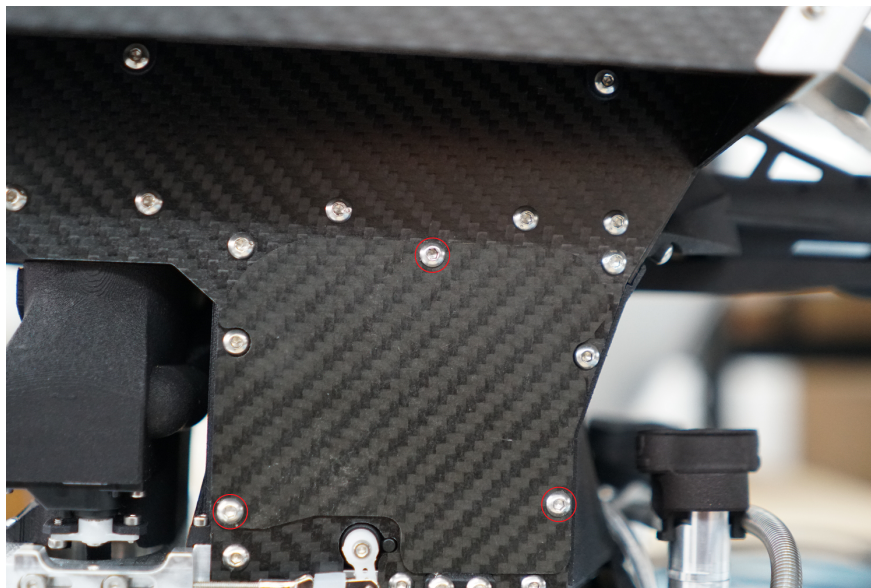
The access plate of Ignis v2. The screws that hold the plate in place are marked with red circles and can be removed using a 2.0mm hex driver.
